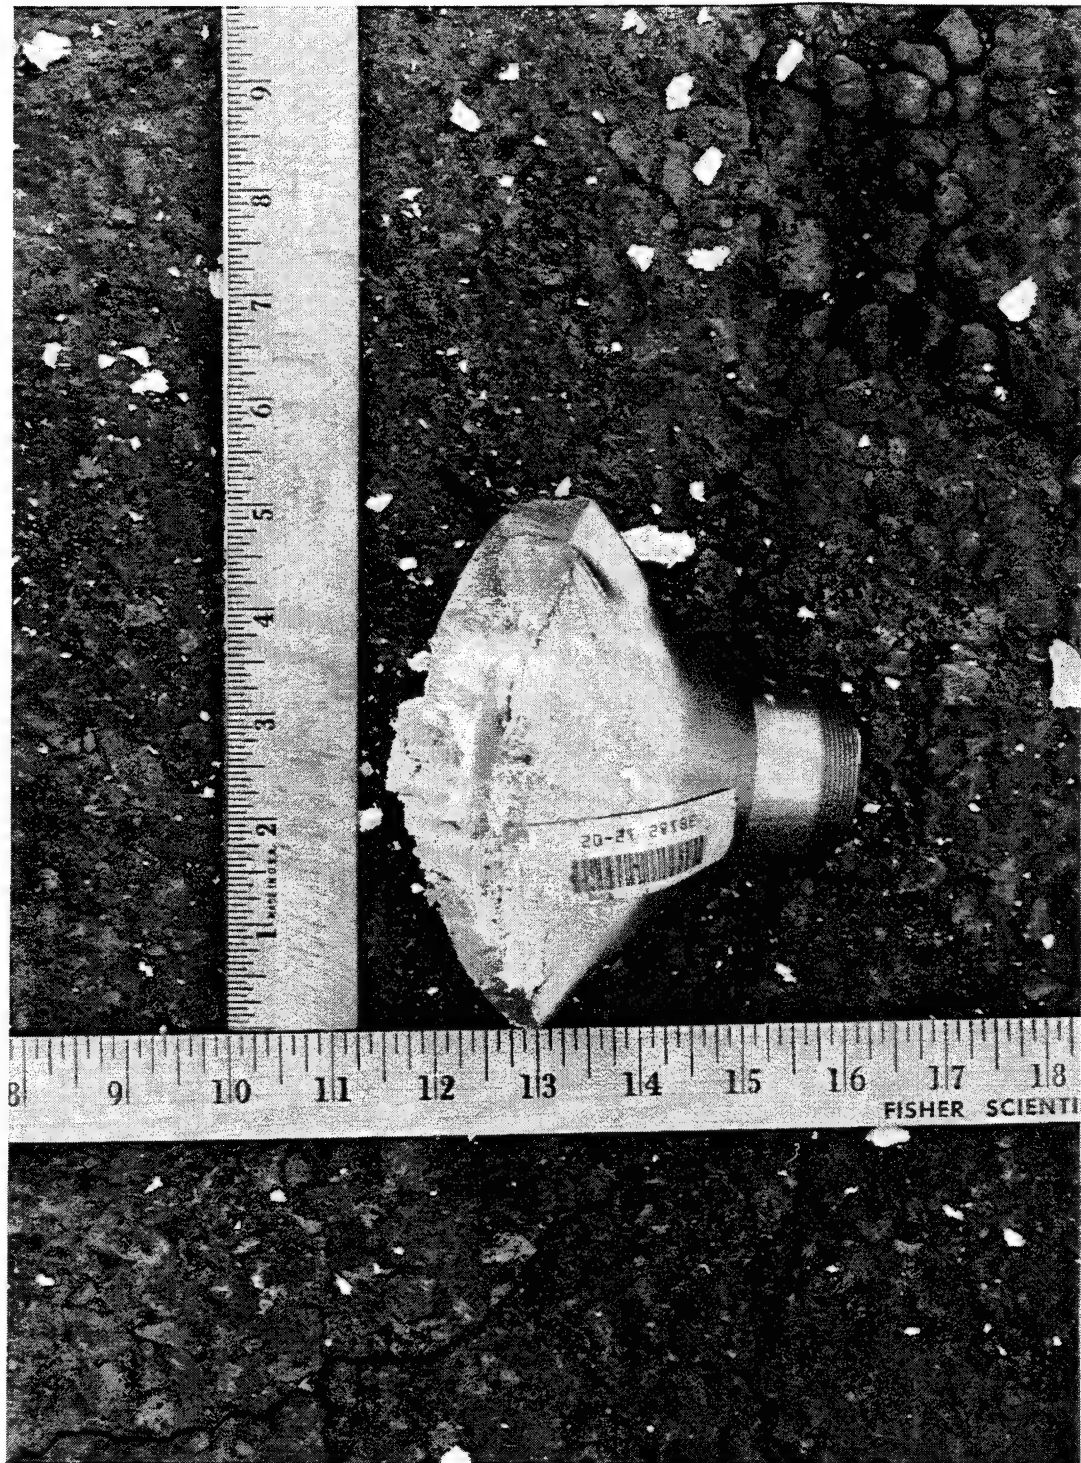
View of rear part of body loading assembly of TOW 2 after a crush test.
